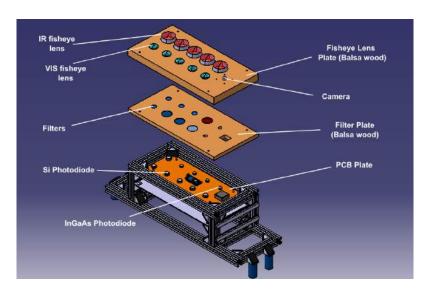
Exploded view of the sensor box mountings of the optical and electronics system.
